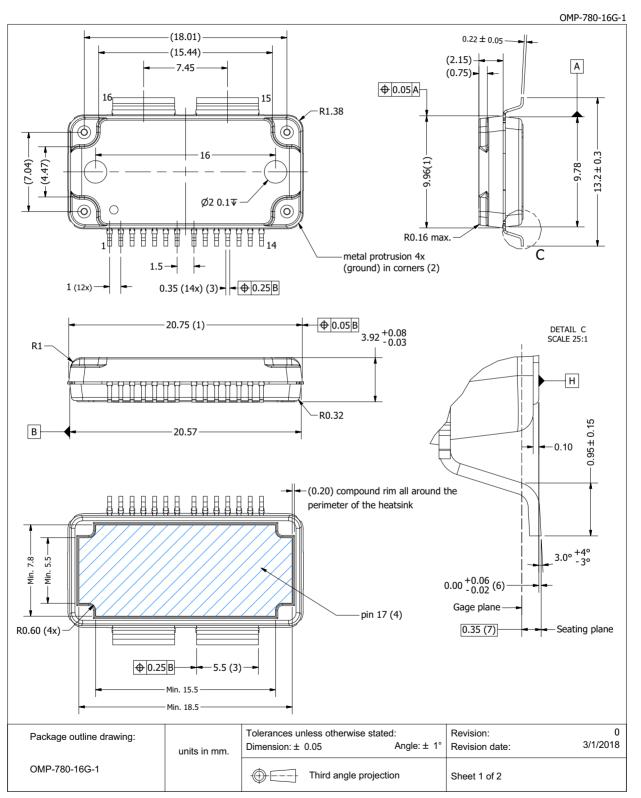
Package outline OMP-780-16G-1 (sheet 1 of 2)
